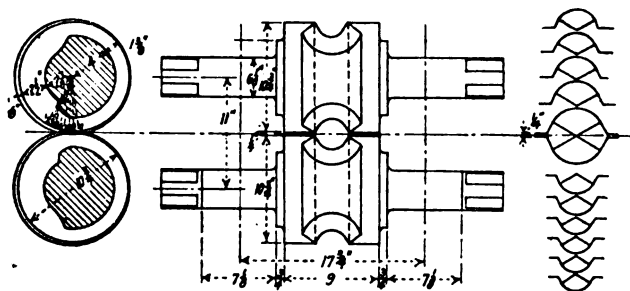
Pilgrim step finishing rolls showing pass sections of the rolling cone.
